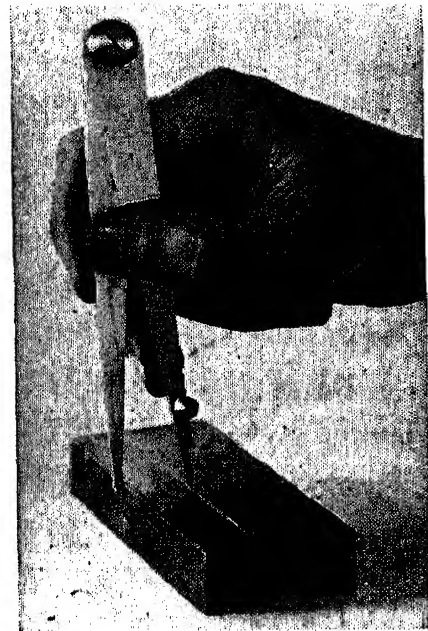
A line being scribed parallel to the side of a block by a hermaphrodite caliper. (Courtesy Brown and Sharpe Mfg. Co.)
